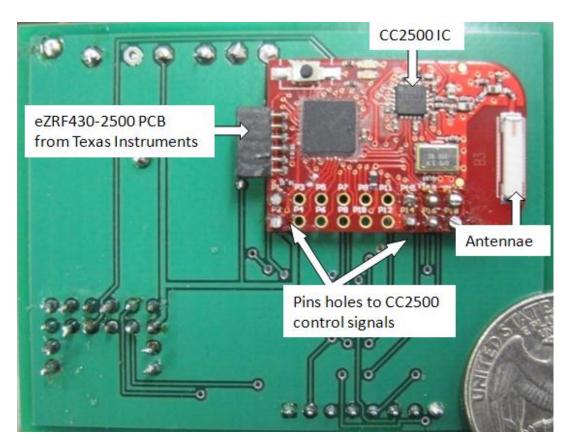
WBT Prototype Bottom View, eZRF430-2500 PCB location
